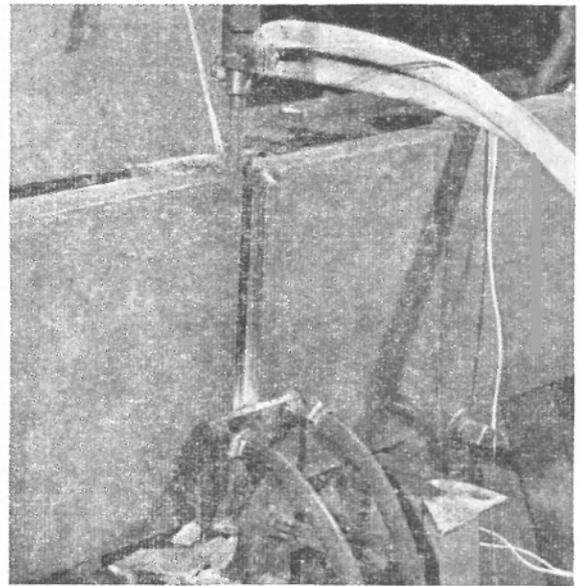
A single consumable guide weld being made between 2 in. thick low alloy steel plates.
